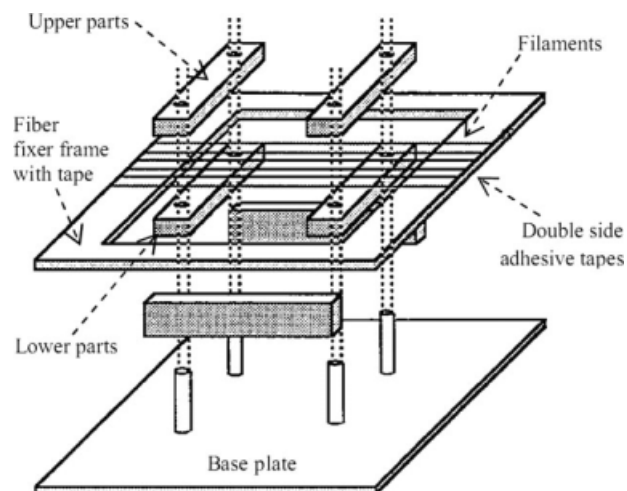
Schematic of mold assembly for pull-out specimen preparation.²⁰
